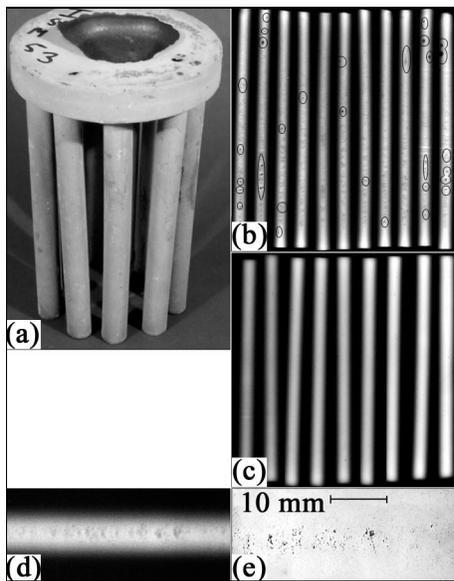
(a) Typical top-gated mould used to cast 20 mm diameter bars (the pouring bush is missing); (b) isolated bubbles in bars cast in mould at 500 °C; (c) absence of major defects in bars cast in mould at 1000 °C; (d) radiograph and (e) macrosection showing layer porosity.
